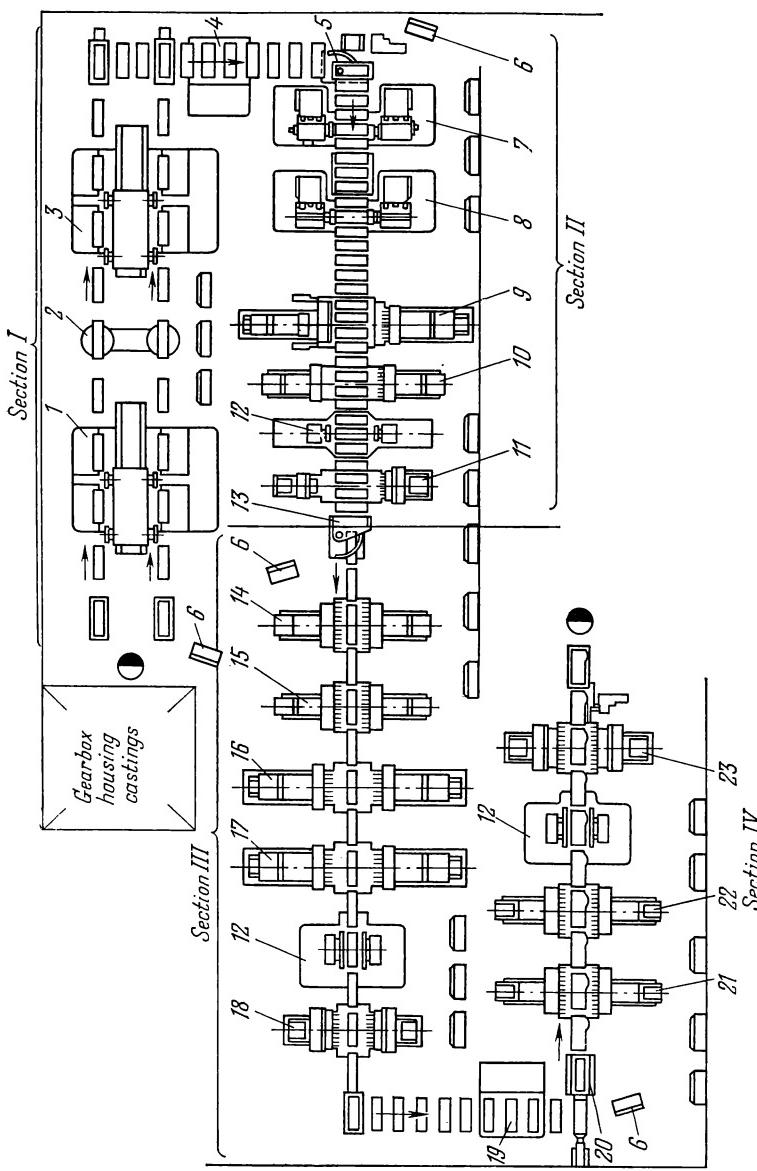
Layout of a transfer machine for processing tractor gearbox housings:
